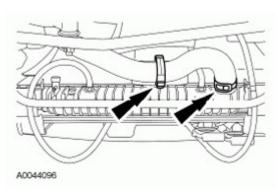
Locating Radiator Hose Hanger Courtesy of FORD MOTOR CO.
